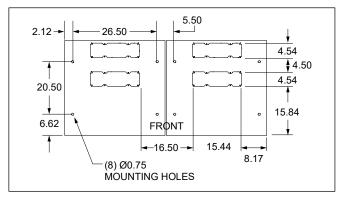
MC-1 Equipment Bay Mounting Hole Dimensions (in inches), Top View
